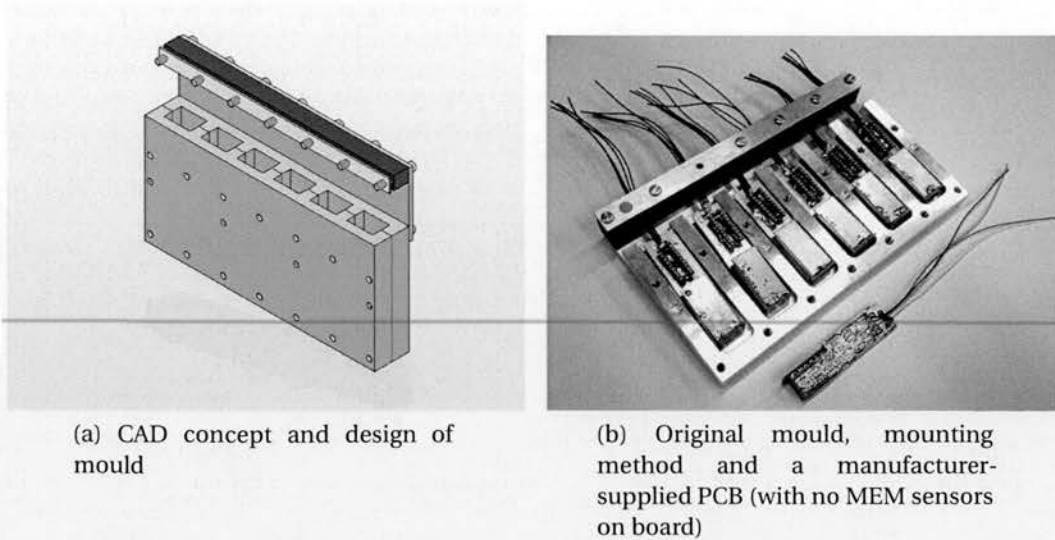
Original mould, mounting method and a Measurand supplied dummy chip (with no sensors on board)
